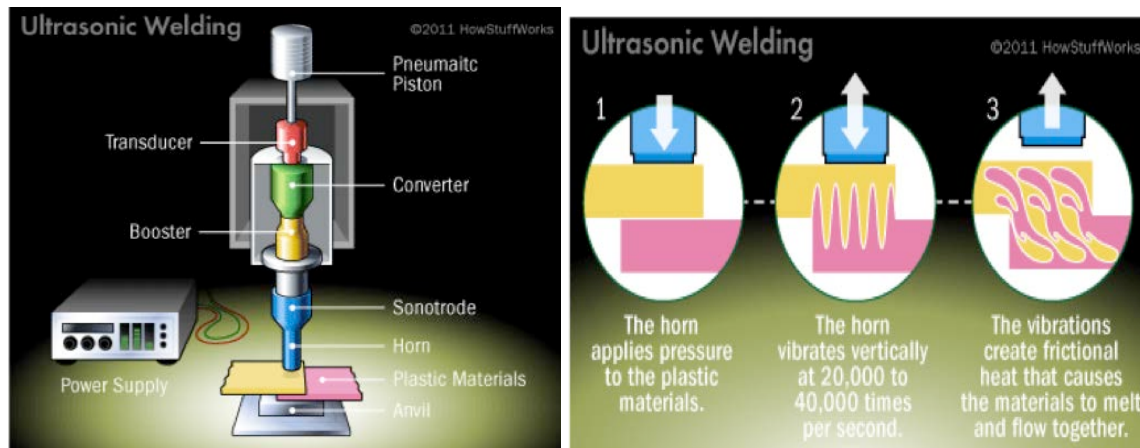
& 2 Diagram of Ultrasonic Welding²²
